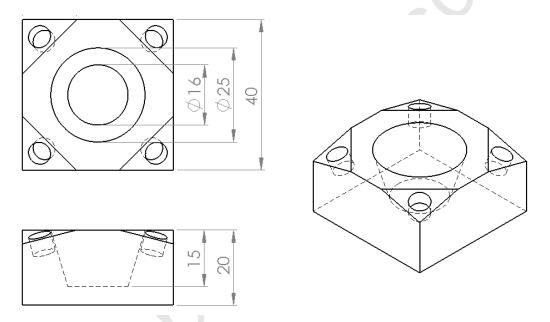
Design of the model used for hybrid FDM and multi-axis machining
